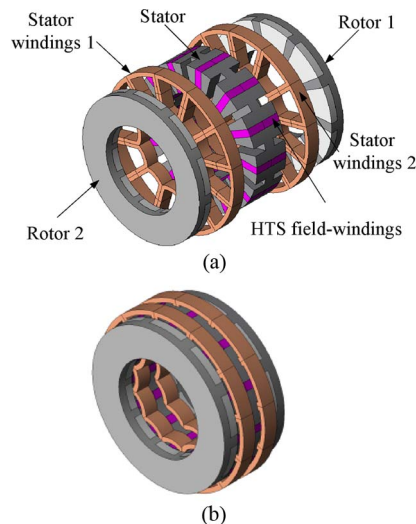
HTS-AFSM configuration: (a) Exploded view and (b) Assembly view.
